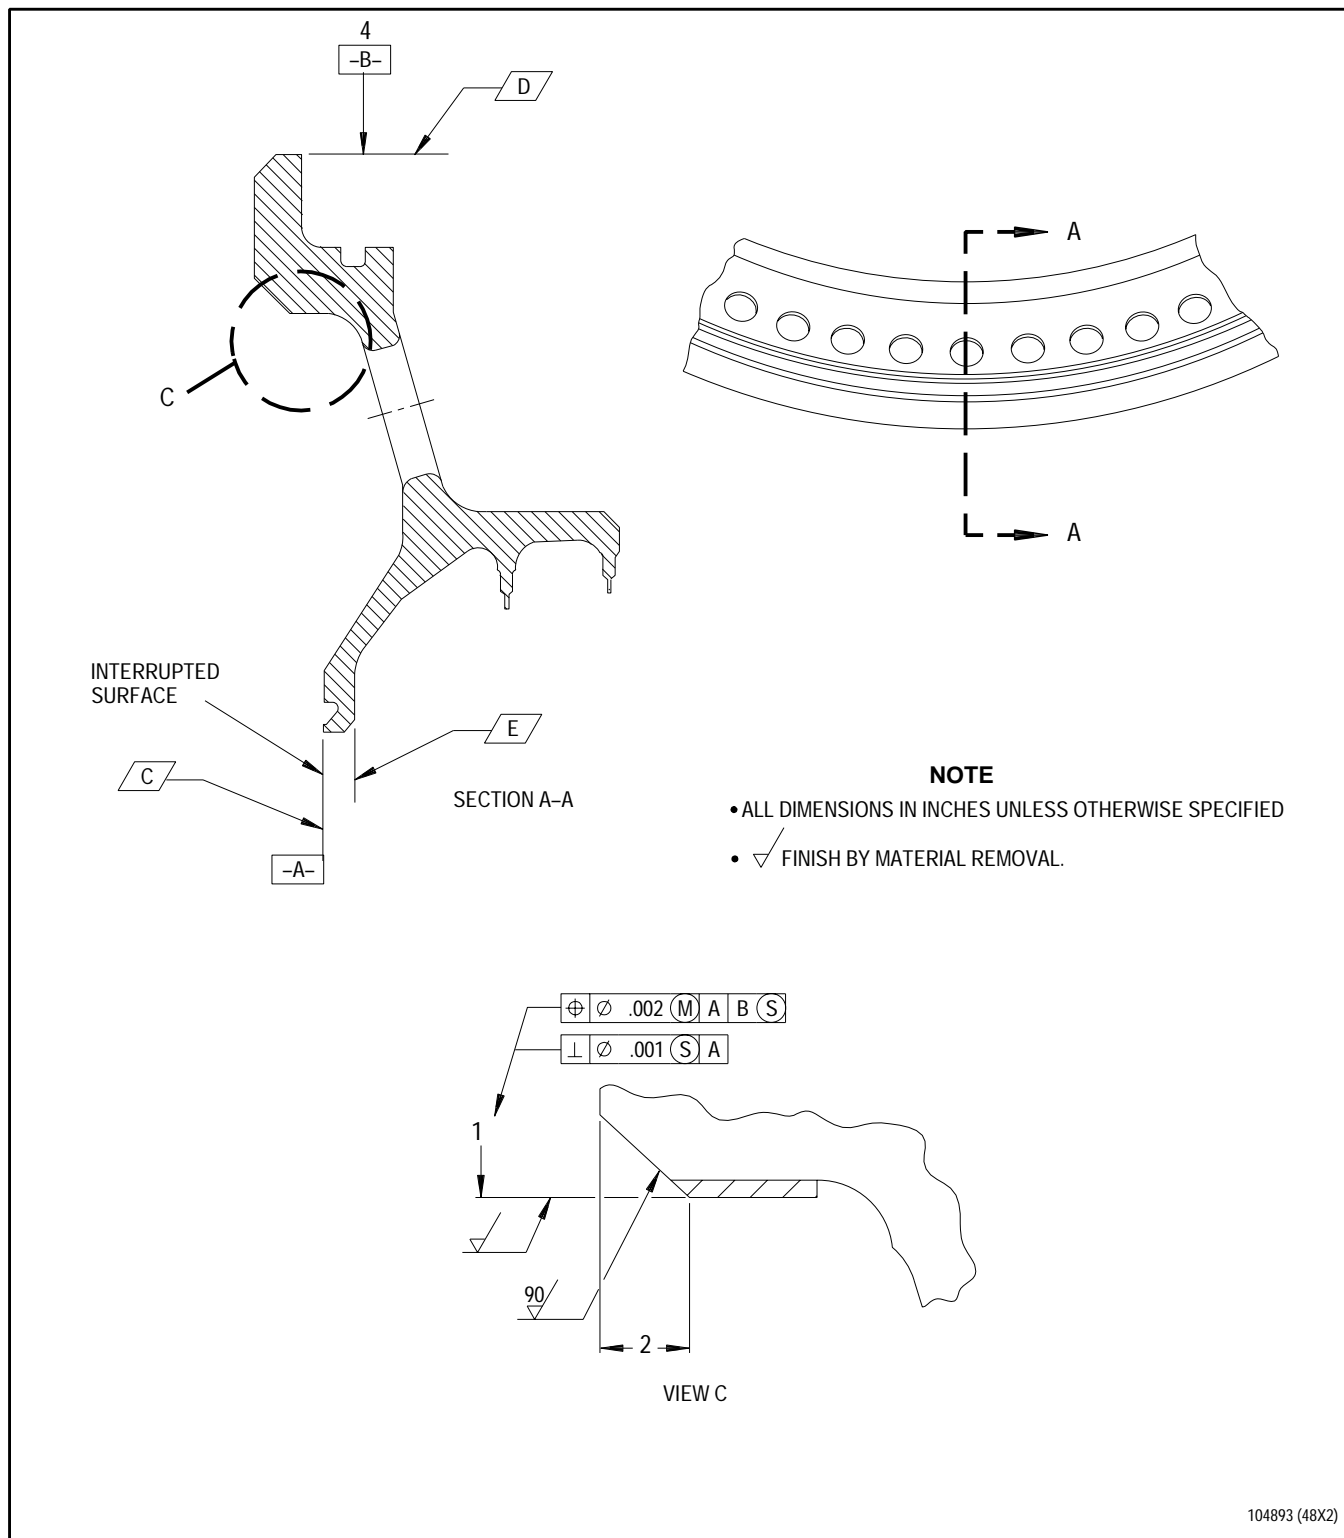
First Stage Turbine Blade Retaining Plate - Final Machining
